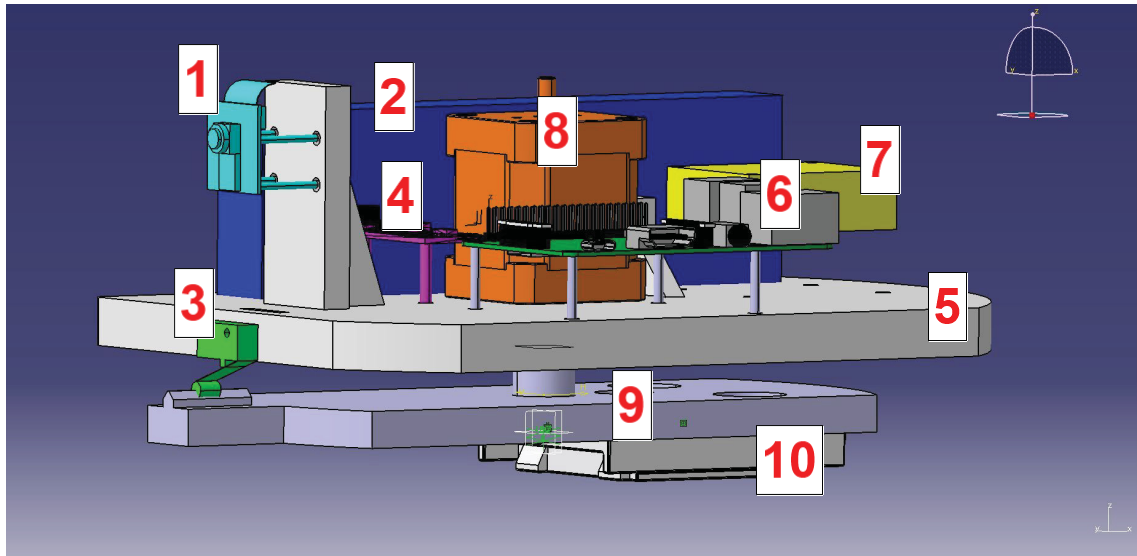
Isometric view of the CAD assembly of the automated panoramic imaging system.
